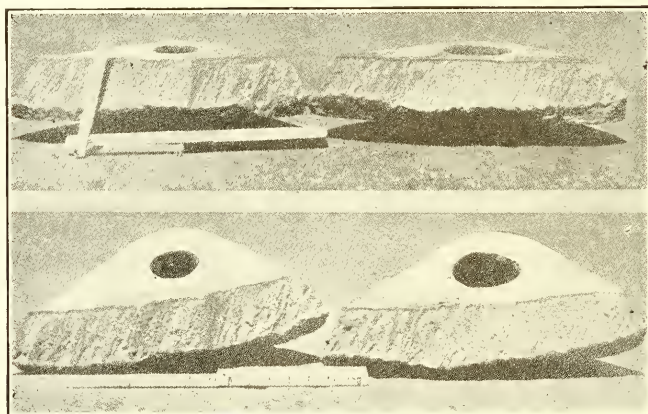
Four Corners of Large Cast-Iron Stone Crusher Head Beveled with Cutting Torch for Welding.
